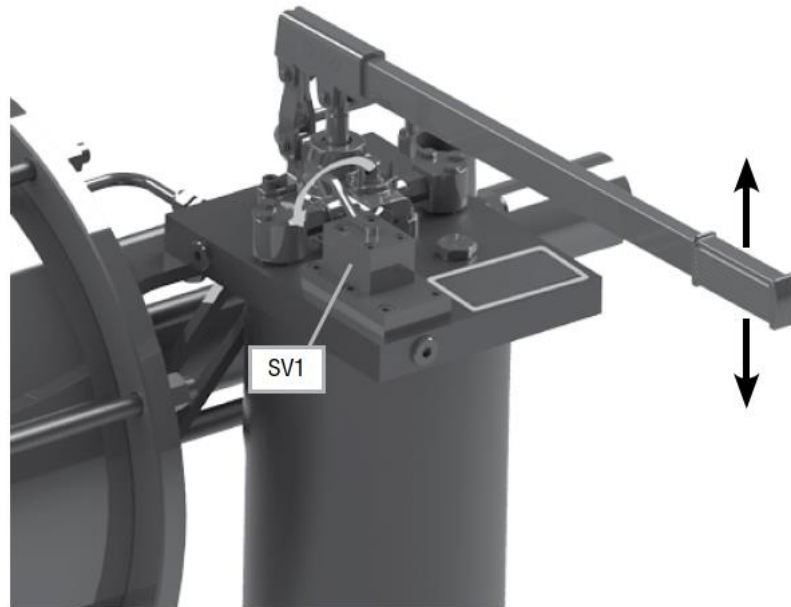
Details of Hydraulic Hand Pump Manual Override for Single-Acting Actuator
